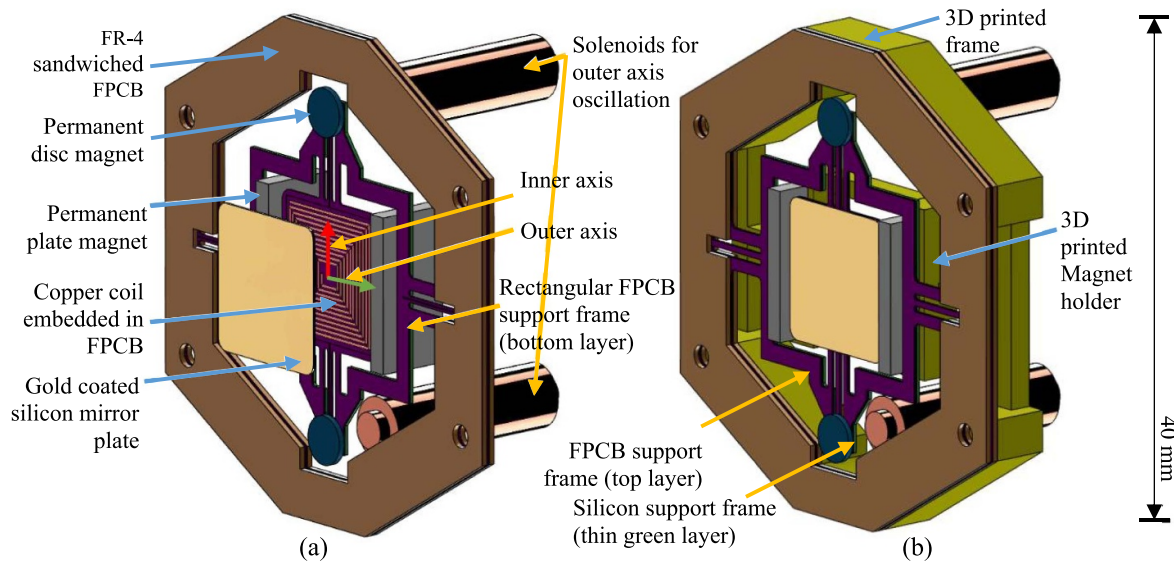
Design of the 2D FPCB micromirror. (a) 2D FPCB micromirror without assembly structure (b) 2D FPCB micromirror with assembly structure.
